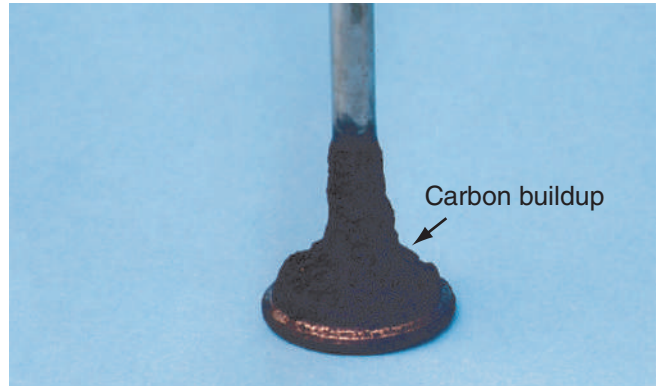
An oily soot or heavy carbon buildup on the back of the valves indicates bad valve seals.
